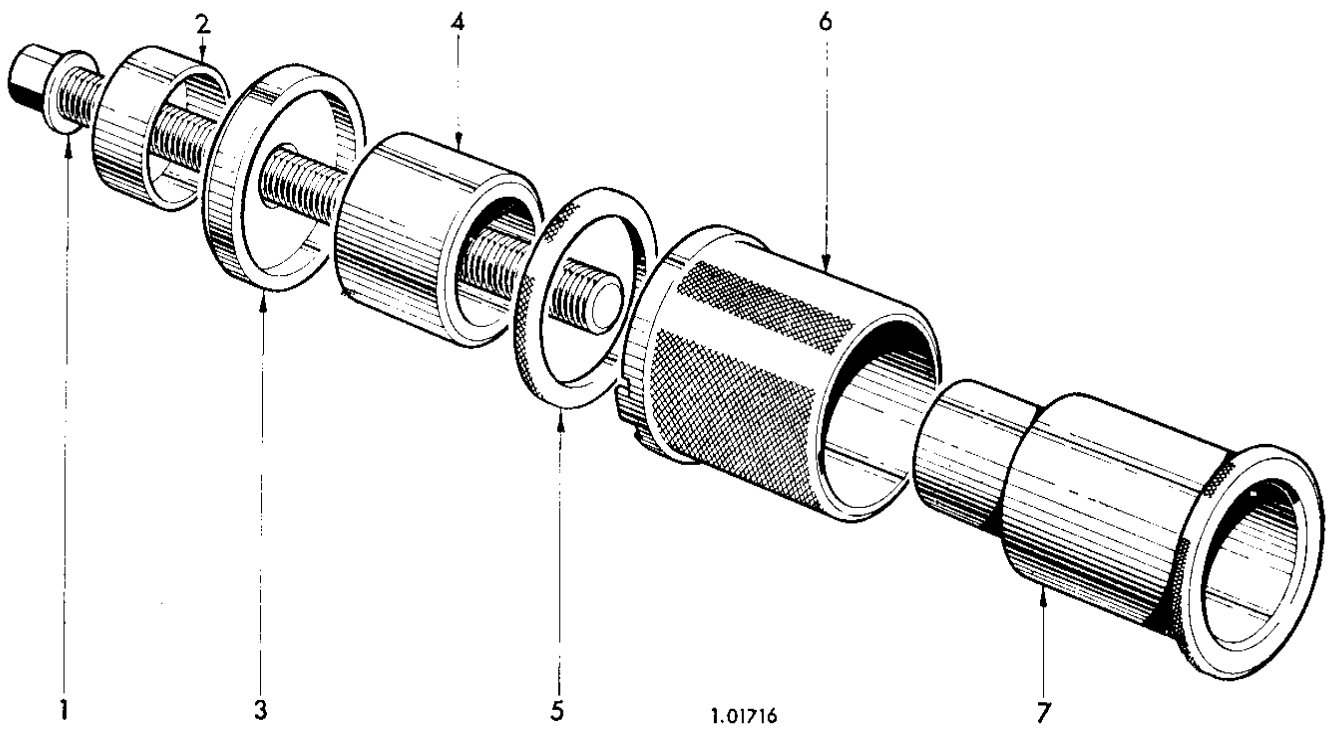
C—Main Bearing Tool Complete - Part No. 317-84
